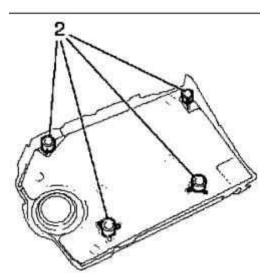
Removing the engine: 1 - cover 2 - support
